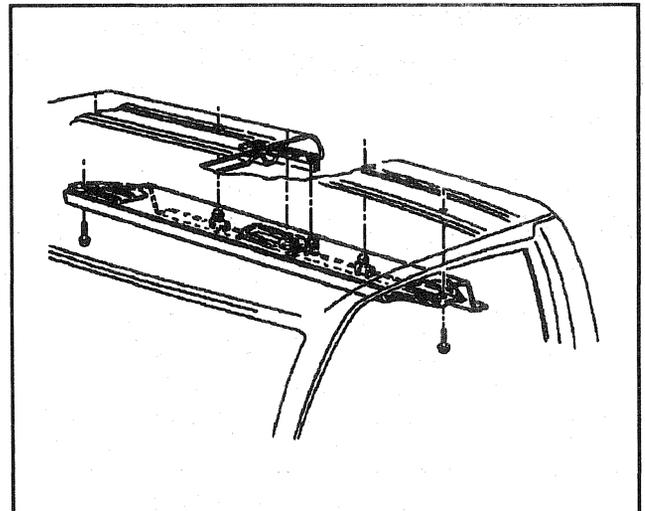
Rear Window Upper Garnish Molding (Pickup, Extended Cab, and Crew Cab)
